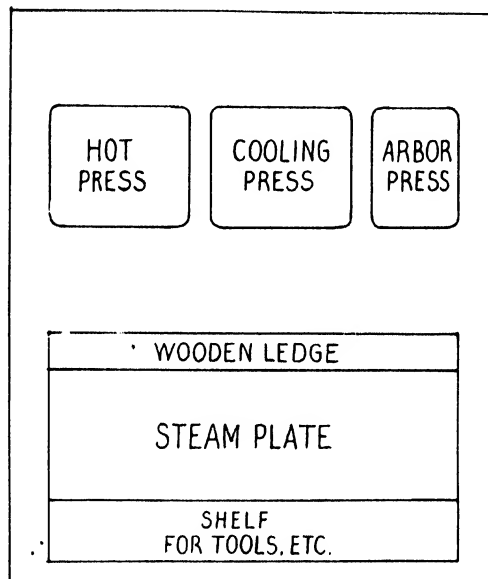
Floor Plan of Equipment Arranged for Molding Thermo-Setting Compositions.
